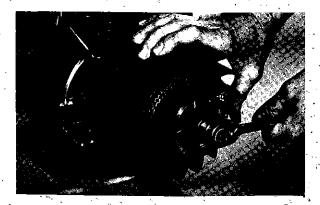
Hold the flywheel as shown to prevent it from turning and loosen the flywheel nut with $34^{\prime\prime}$ socket wrench.
